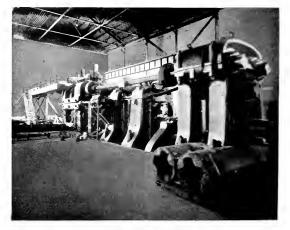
Main Rolls of Universal Plate Mill Driven by Induction Motor shown in Fig. 7
